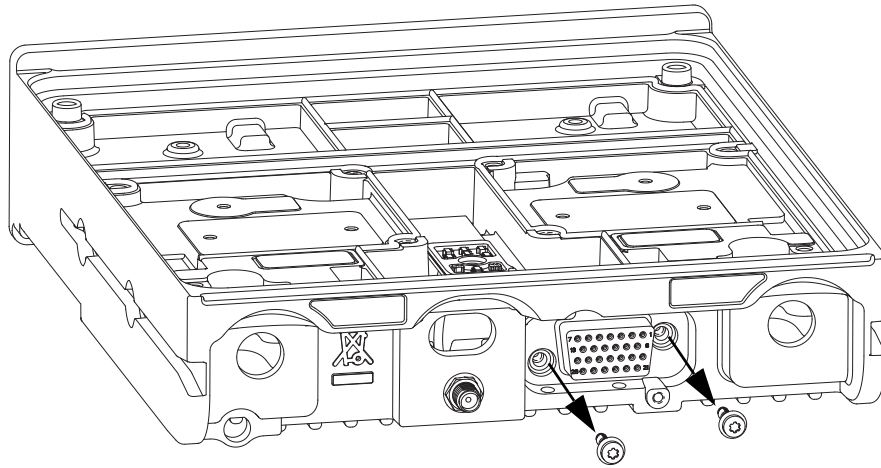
Removing the J2 Rear Accessory Connector External Screws
